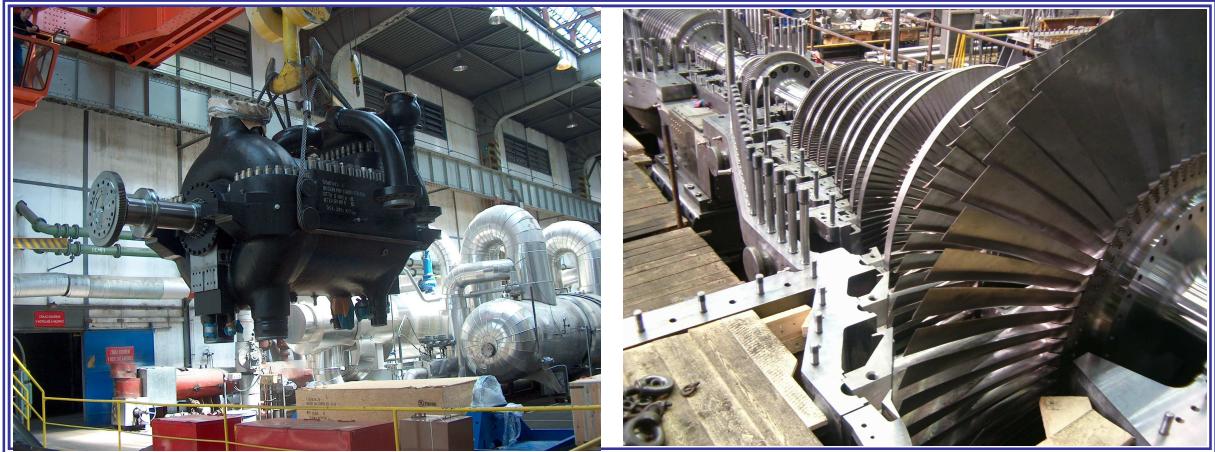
Preliminary Assembly of a Complex Machinery
